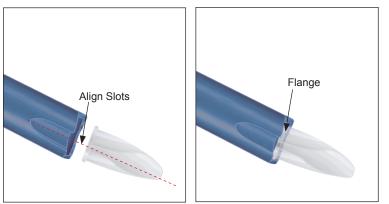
Figure BC (LEFT) Align the slot of the cable grommet with the slot of the tool. Figure BD. (RIGHT) Insert flange of cable grommet into the tool.
